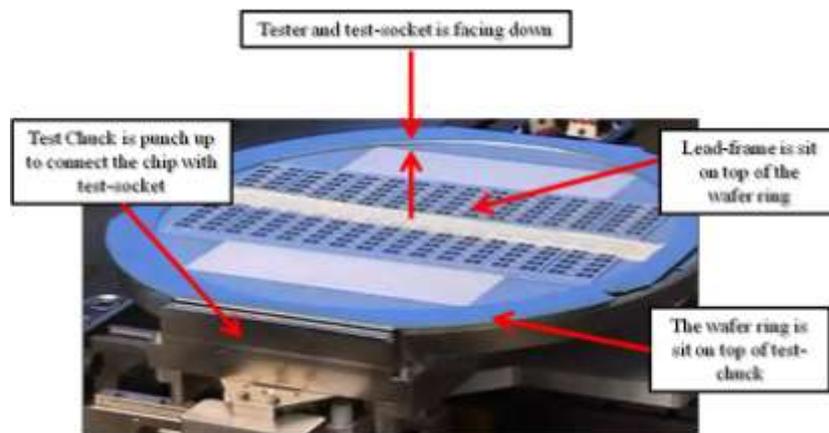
The Test Chuck of the Wafer-Ring Testing Handling
